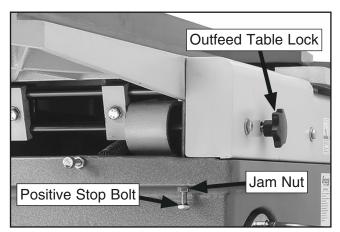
Location of outfeed table lock, positive stop bolt, and jam nut.
